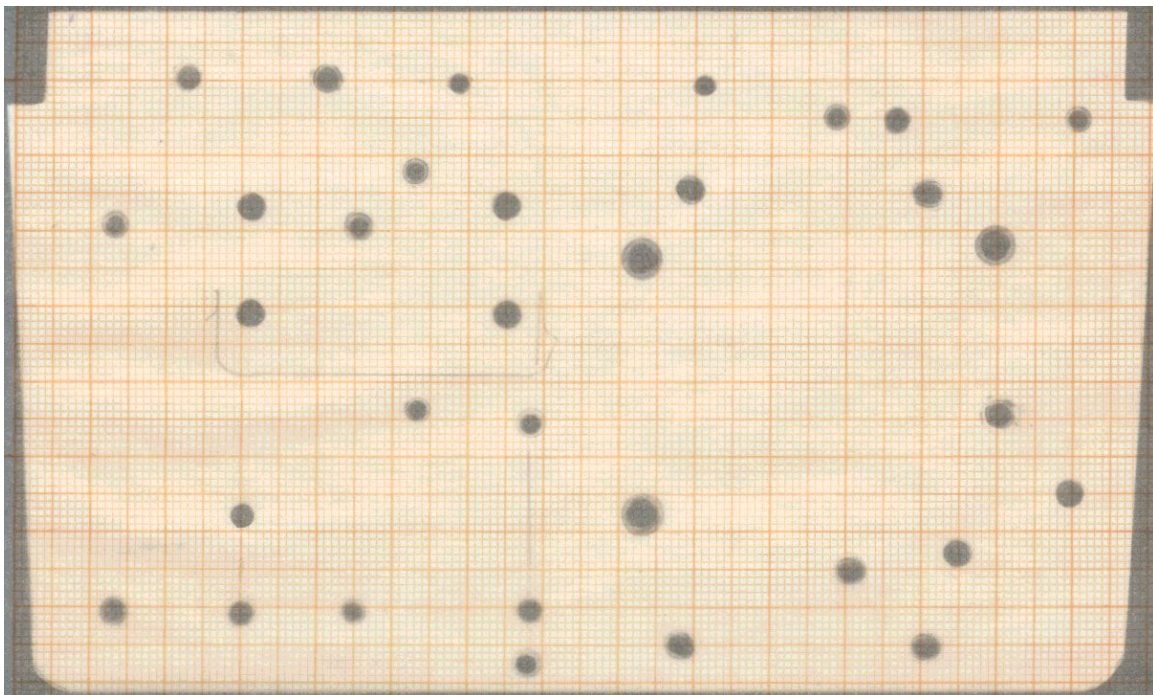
Cut-out and drilling pattern for the aluminium plate which forms the chassis supporting the F1OPA driver amplifier, USB to Ethernet converter and 5V and 12V power supply.
